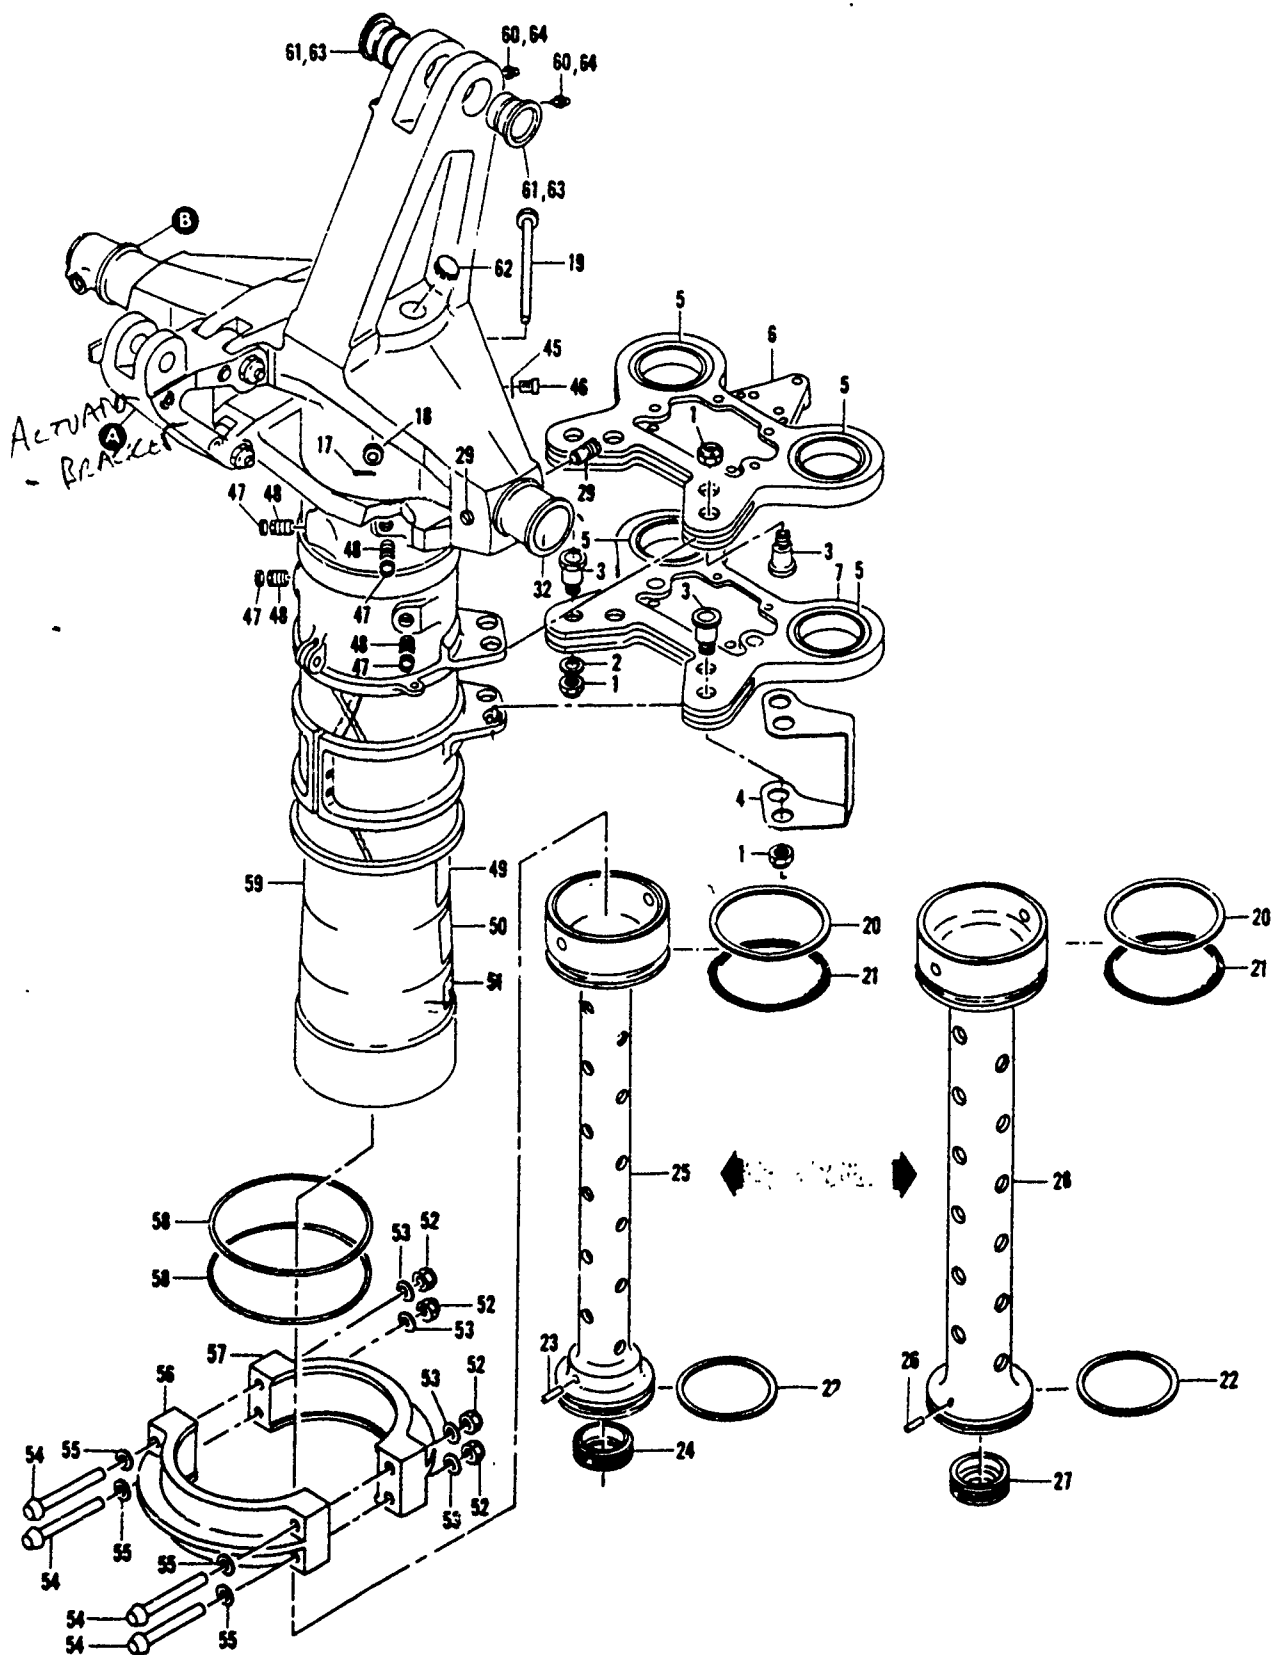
Nose Gear Outer Cylinder Assemblies (Sheet 1 of 2)
